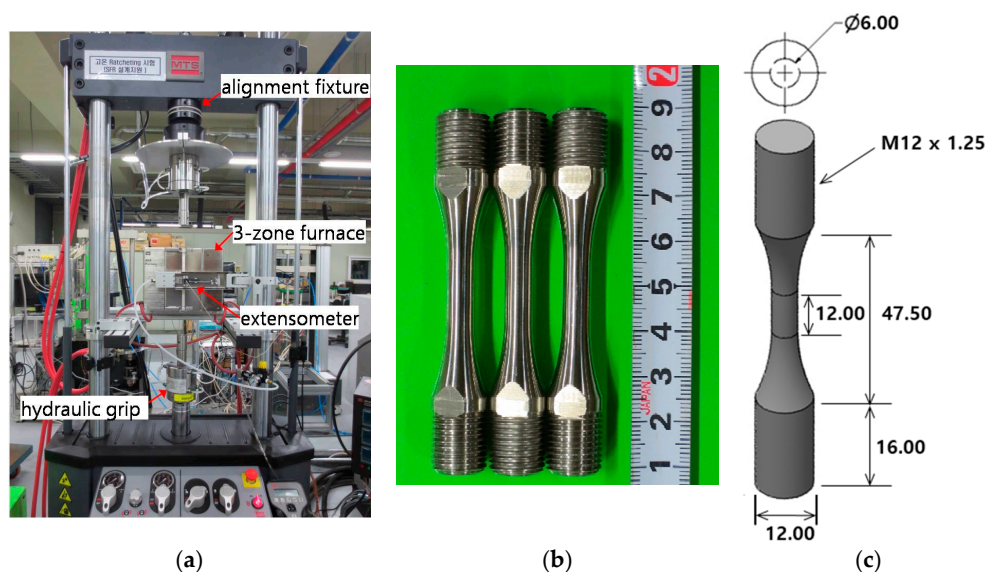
Photos of test facility and specimen used: (a) facility; (b) specimen; (c) schematics and dimensions of specimen.
